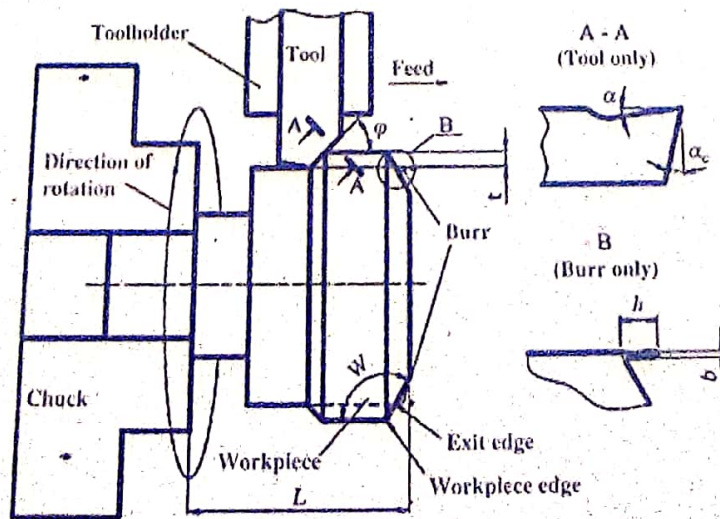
Experimental setup, tool geometry, and final burr dimensions. Reproduced from Toropov, A.; Ko, S.-L.; Kim, B.-K. Experimental Study of Burrs Formed in Feed Direction when Turning Aluminum Alloy Al6061-T6. *J. Mach. Tools Manuf.* 2005, 45, 1015-1022.
